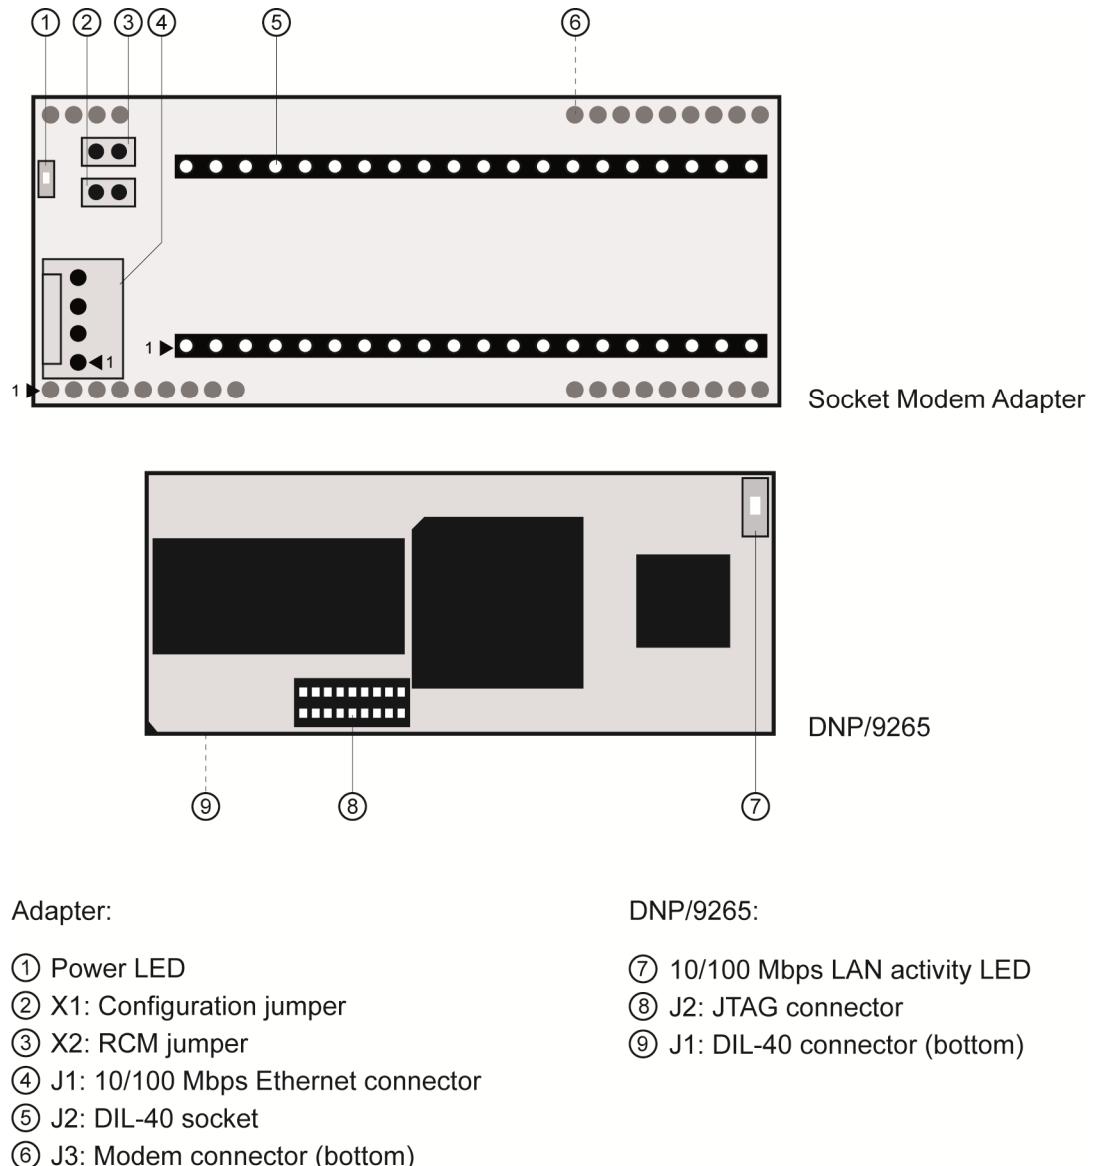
Board layout DIL/NetPC DNP/9265-SMOE
